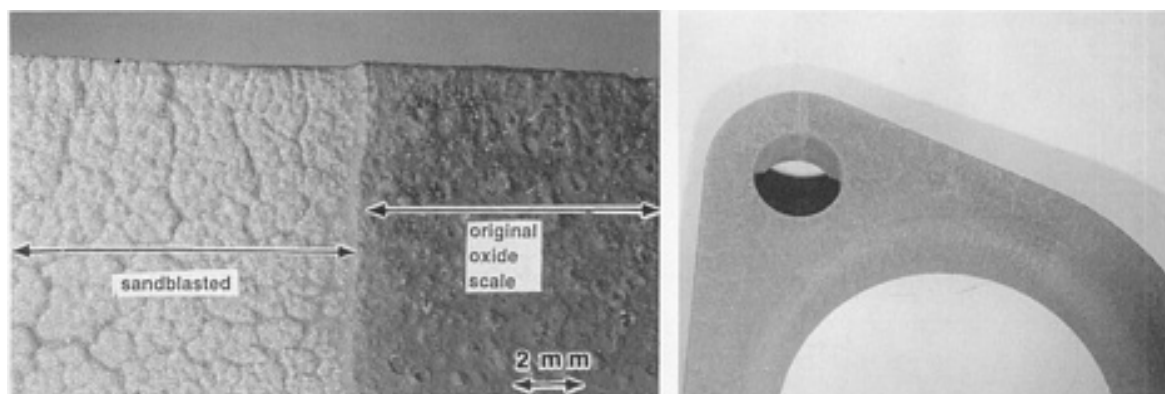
Hairline cracks and fracture of P/M flange
